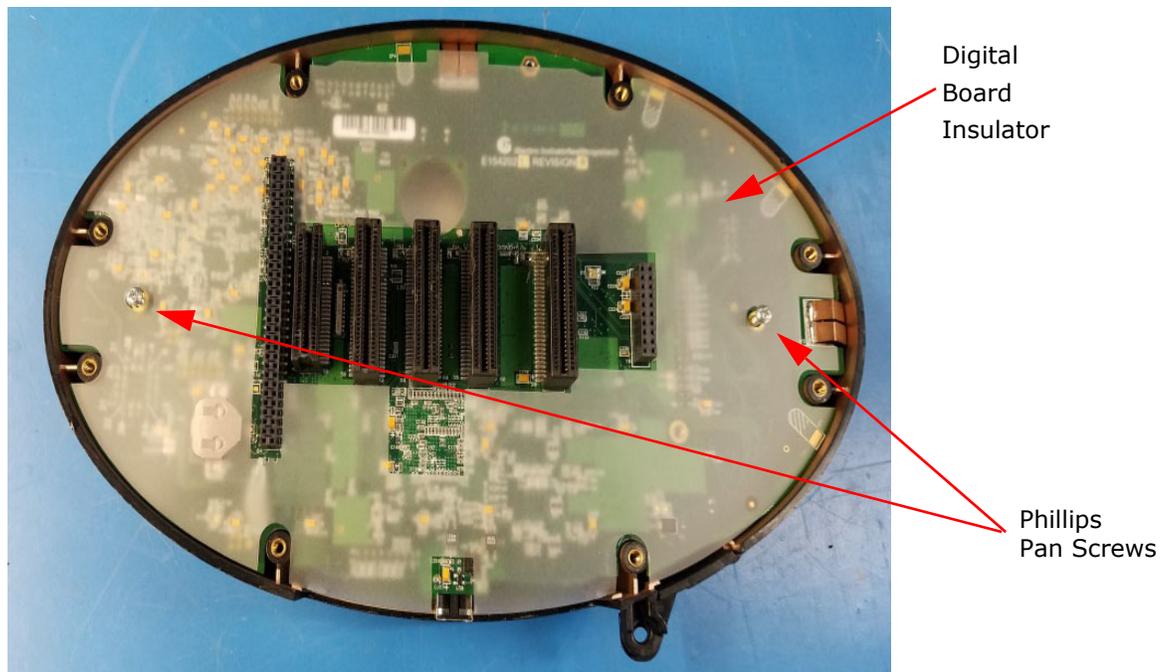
Inside of Meter Showing the Digital Board Insulator
